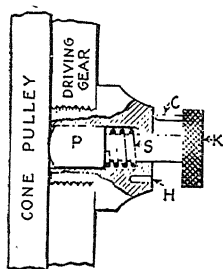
Lockpin. When the lockpin is arranged as shown the cone pulley is free to revolve past the face gear (spindle-driving gear). There are three or more equidistant holes in the pulley which makes it unnecessary to turn the pulley more than one-third of a revolution to bring a hole in front of the plunger.
